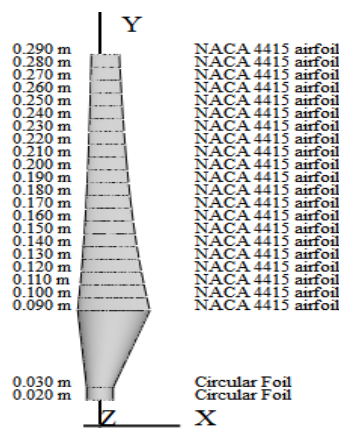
Horizontal axis wind turbine model blade geometry.
